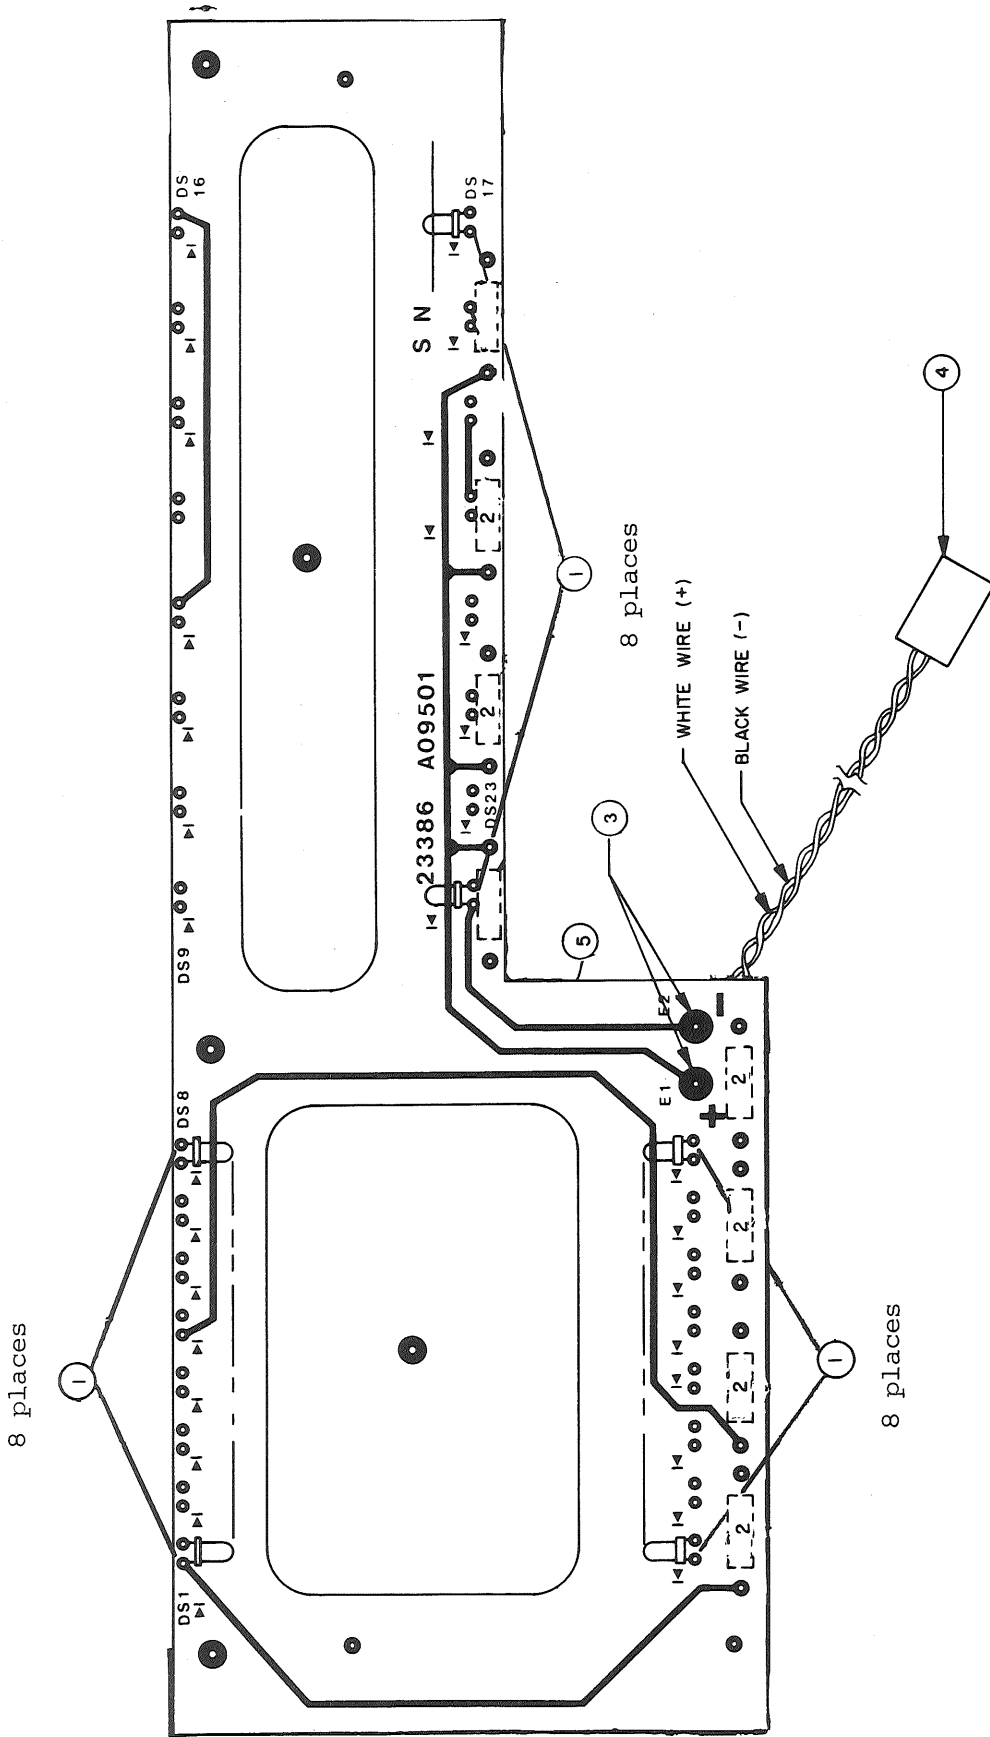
Circuit Card Assembly, LCD/LED Board
